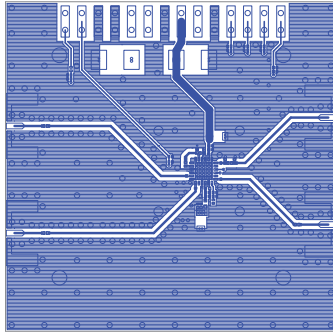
SKY66104-11 Evaluation Board Assembly Drawing
